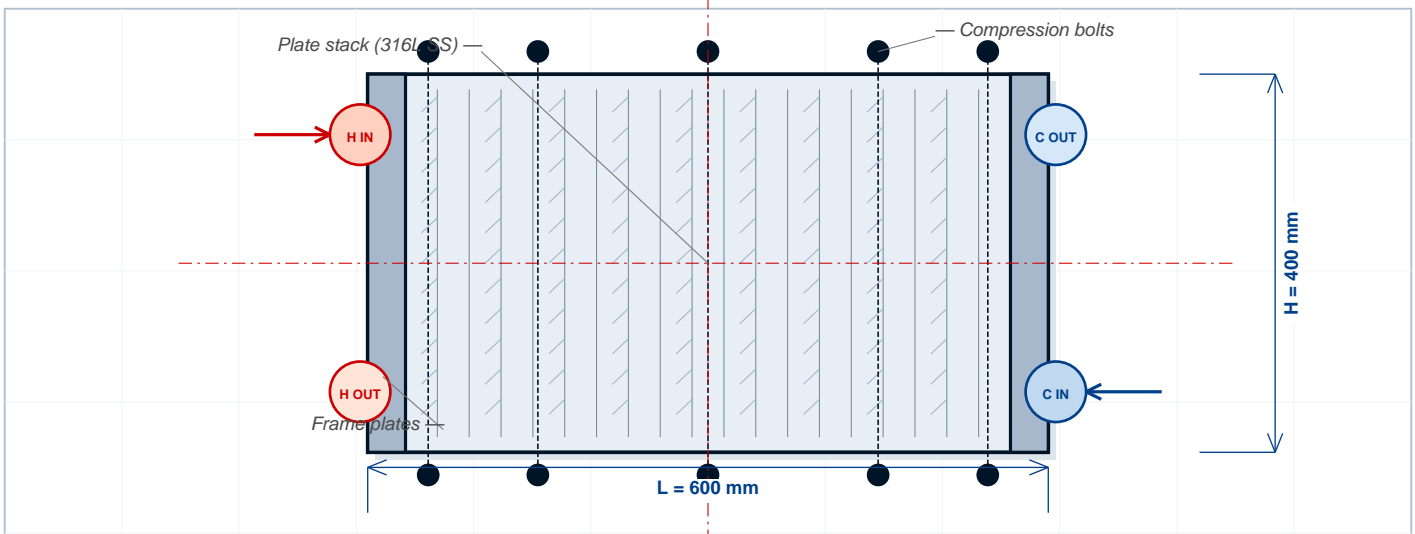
PLATE / TUBULAR / SHELL-AND-TUBE HEAT EXCHANGERS
